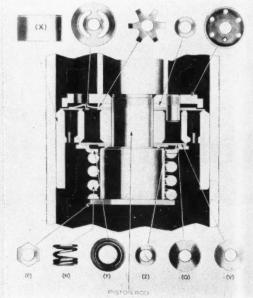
Piston and rebound valve assembly, with reduced illustrations of parts, showing order of assembly.
